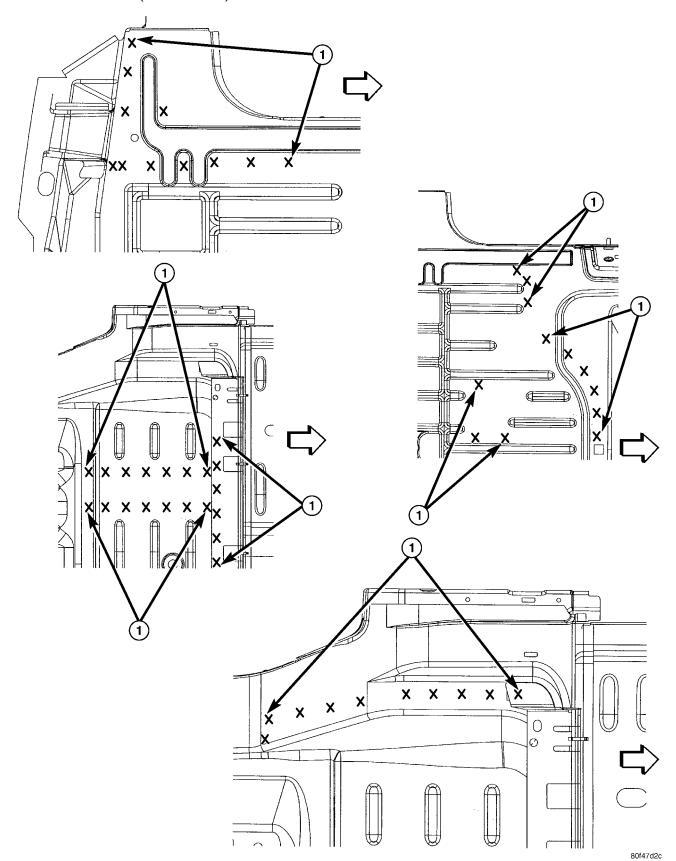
REAR FLOOR PAN TO REAR CROSSMEMBER AND FUEL TANK SUPPORT - LEFT SIDE
